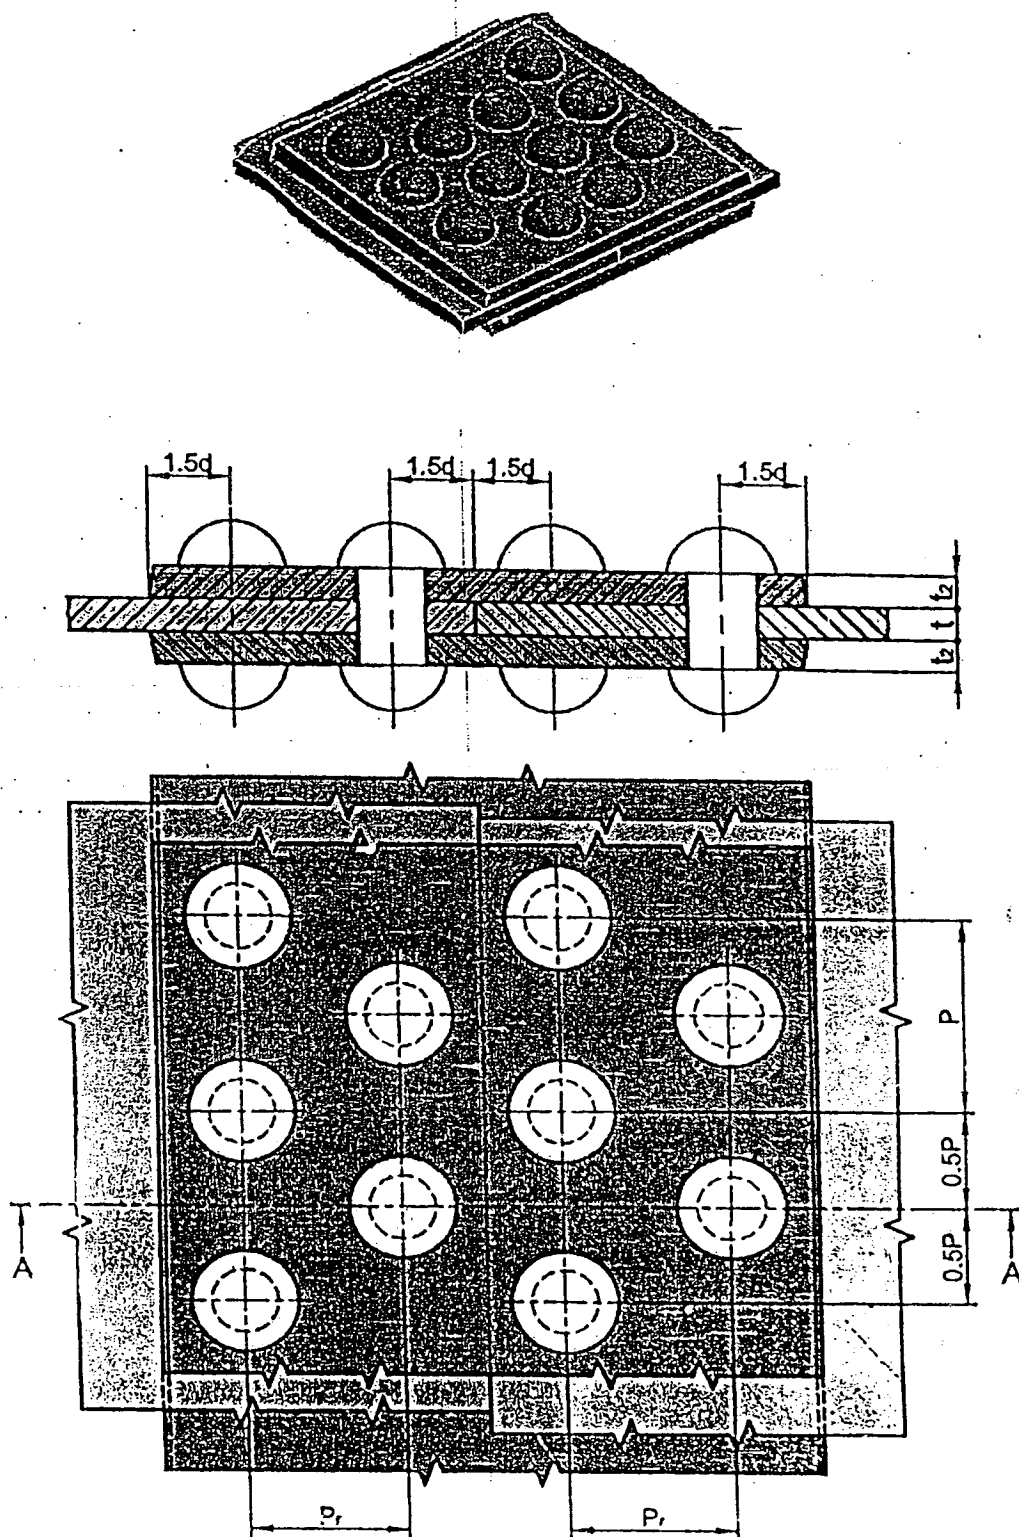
Double Riveted Butt Joint with Double Cover Straps (Zigzag Riveting)
